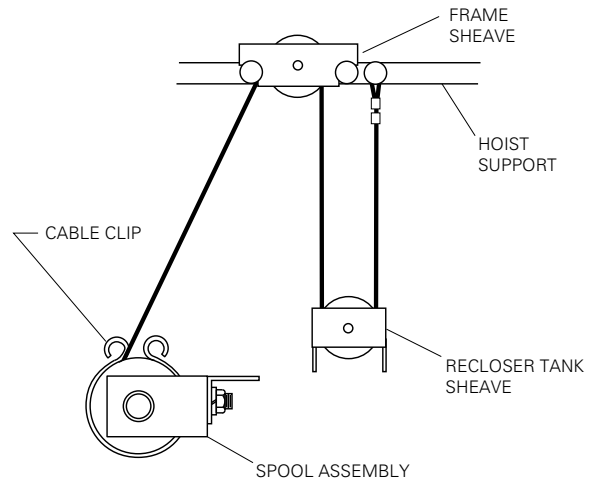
Threading the cable from the frame sheaves to the spool assemblies.
